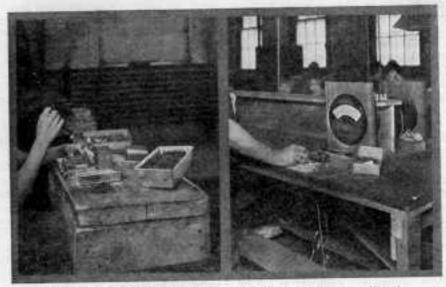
The press which fastens the lead clips to the resistance elements. Fig. 4. Testing the grid leaks on a direct-reading meter.
